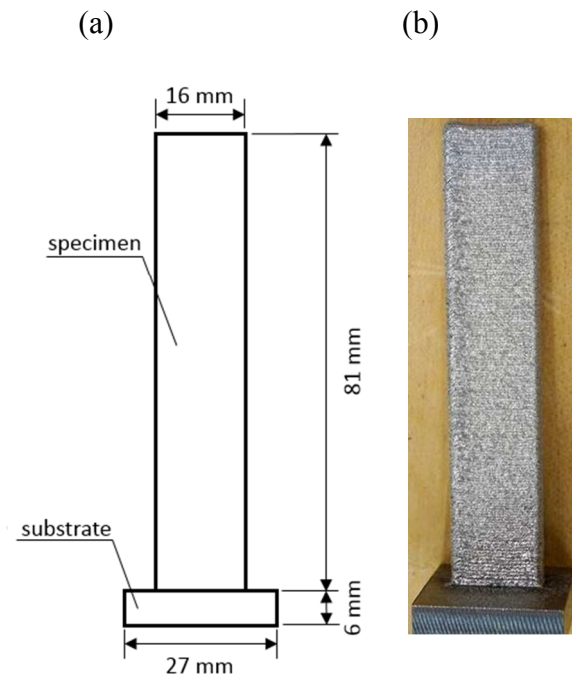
Dimensioned drawing of the specimen (a), and as-built LENS Ti-6Al-4V sample deposited on the substrate (b).
